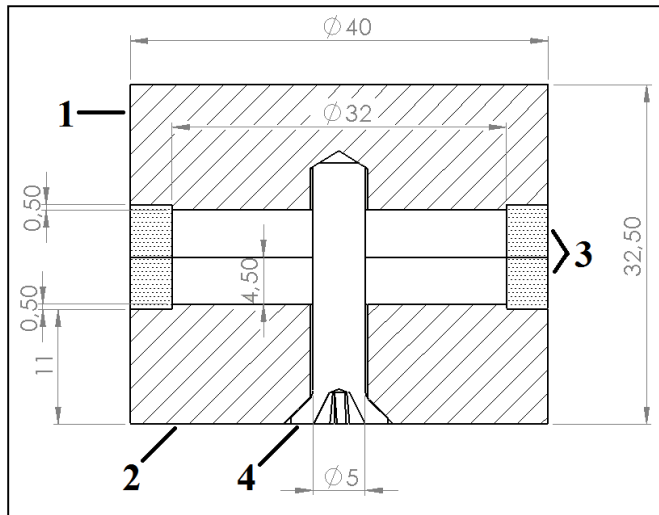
The cross section view of VAP-1: the top (1), the bottom (2), two PZT-5 rings (3) and an M5x25 bolt (4)
